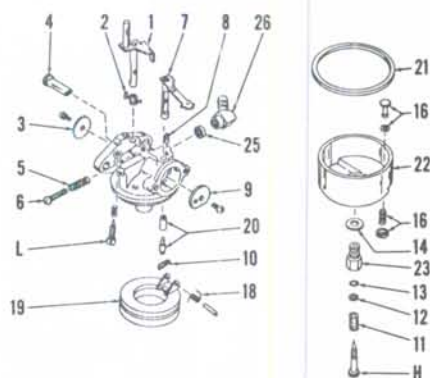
Exploded view of Tecumseh float type carburetor. Late type with fuel pump (4) is shown; however, other types are similar.
